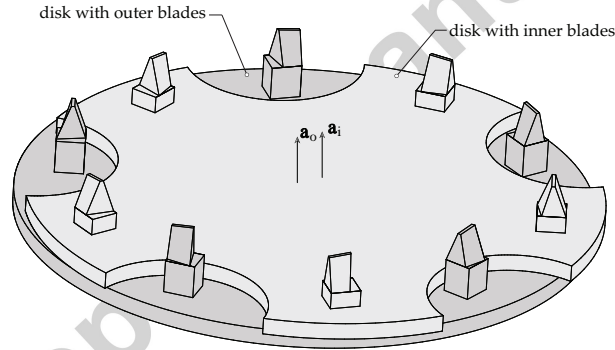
Dual face-hobbing cutter for generation of a right-hand gear.
